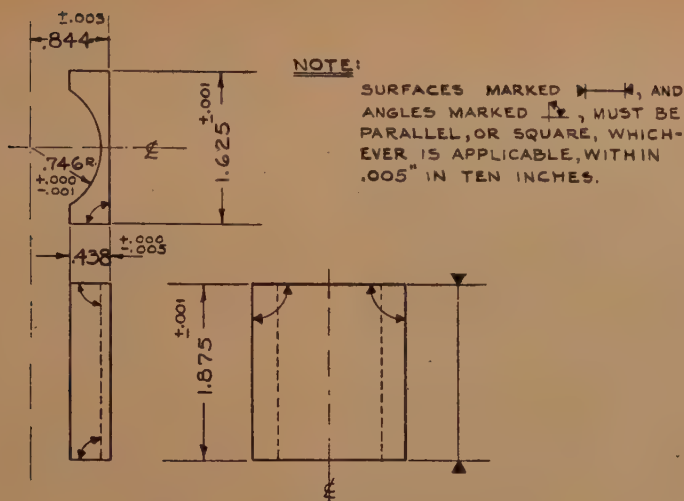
TYPICAL DESIGN OF POLE PIECE.
